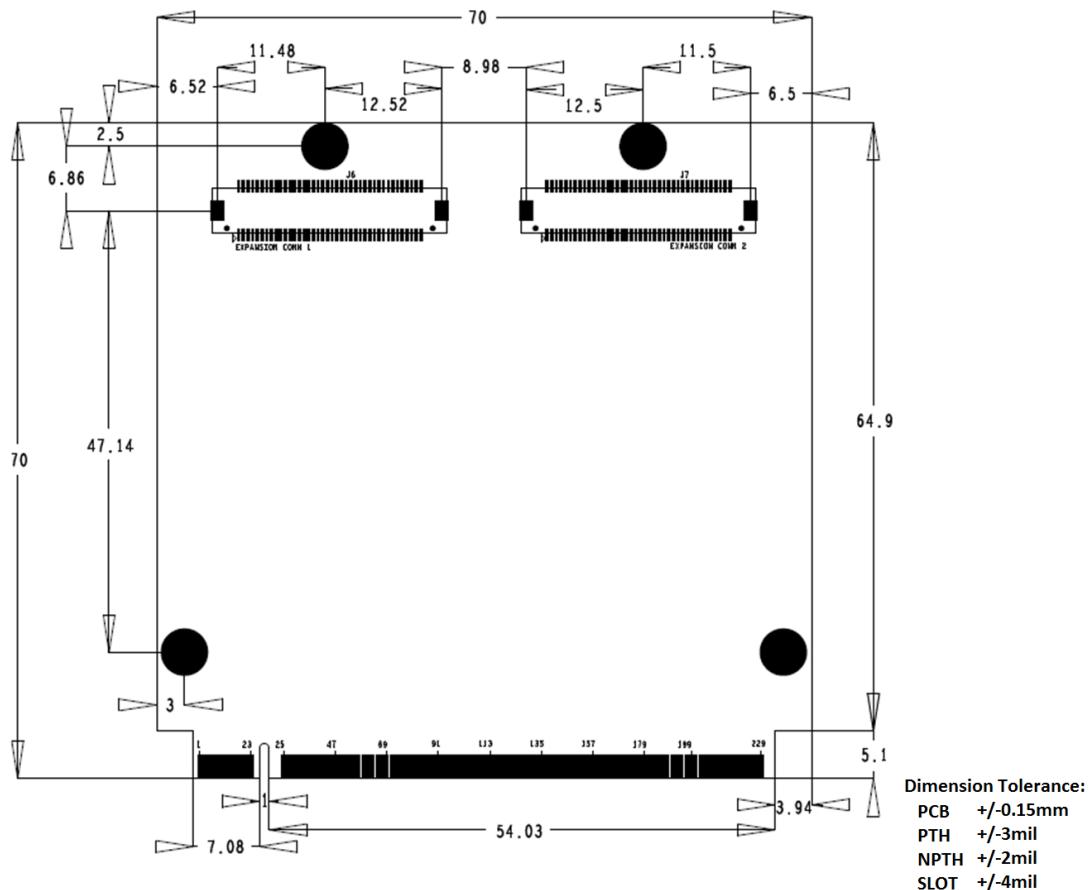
Mechanical dimension of Qseven SOM- Bottom View
